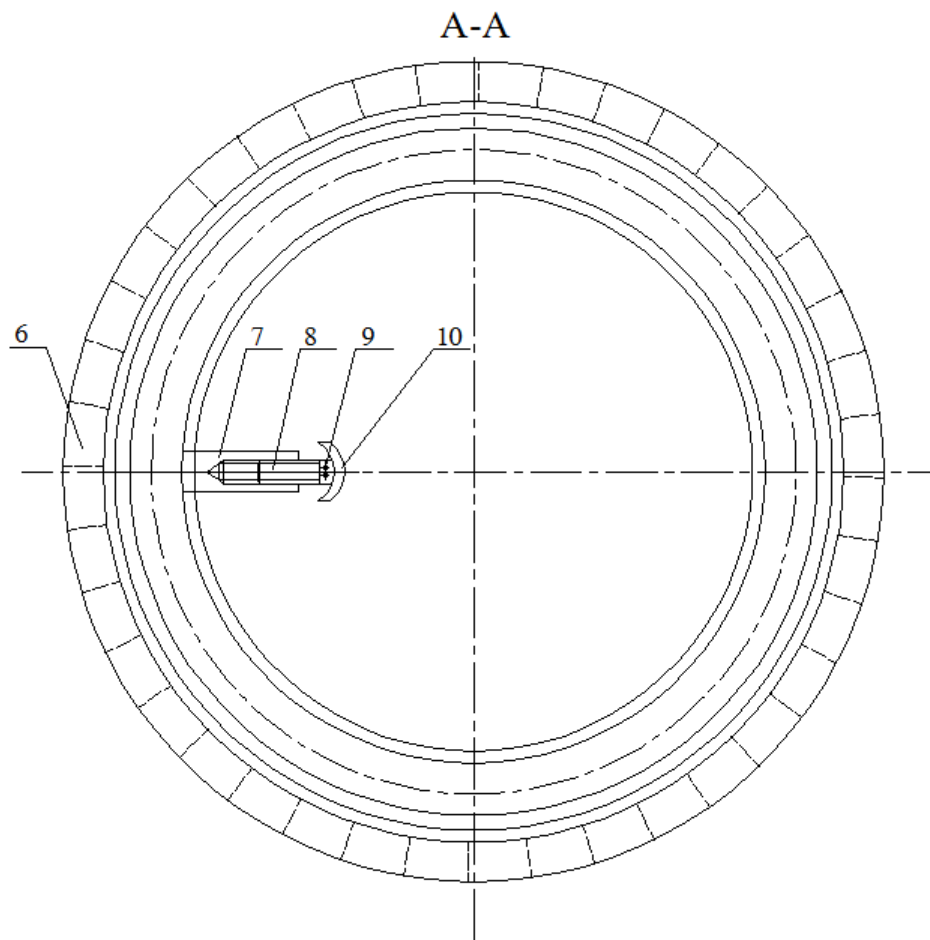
structure graphic drawing of hand & box seedcase cutter A-A view
